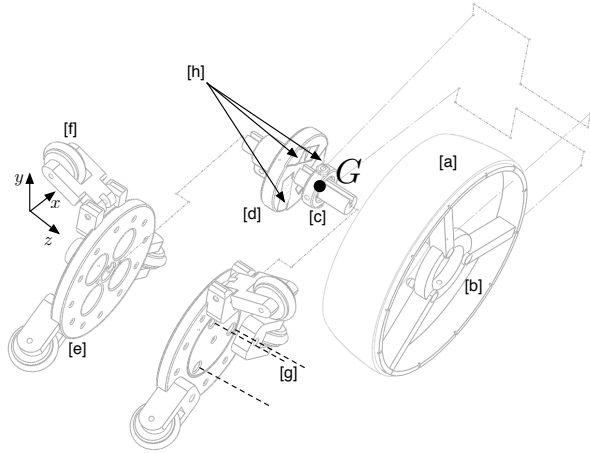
The exploded view of the proposed design. All key components are laid out. Details: [a] Membrane, [b] Drum, [c] Gimbal, [d] Sensor Chassis, [e] Carrier, [f] Suspension Legs, [g] Axes of Linear Springs, [h] Supporting Points for Drum
